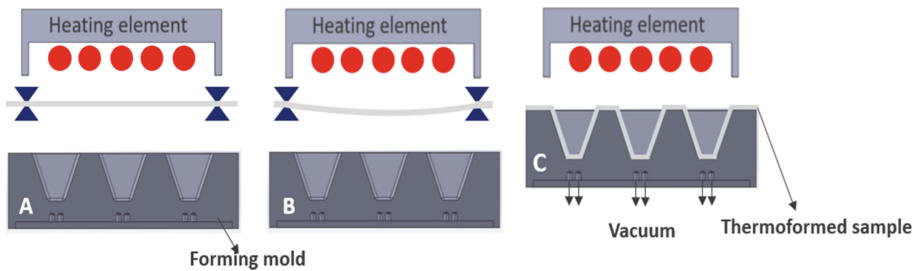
Thermoforming machine heats a laminated stack until it reaches the thermoplastic polymer’s glass transition temperature and becomes soft. Then, utilizing a strong vacuum, it is formed over a forming tool.
